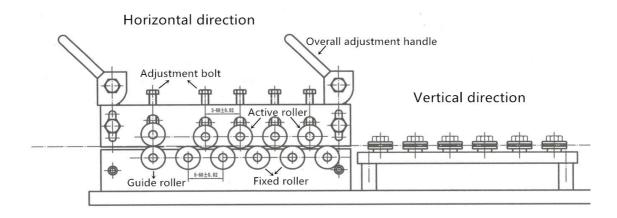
An illusion of Wire Straightening Process (wire-straightener.com)
